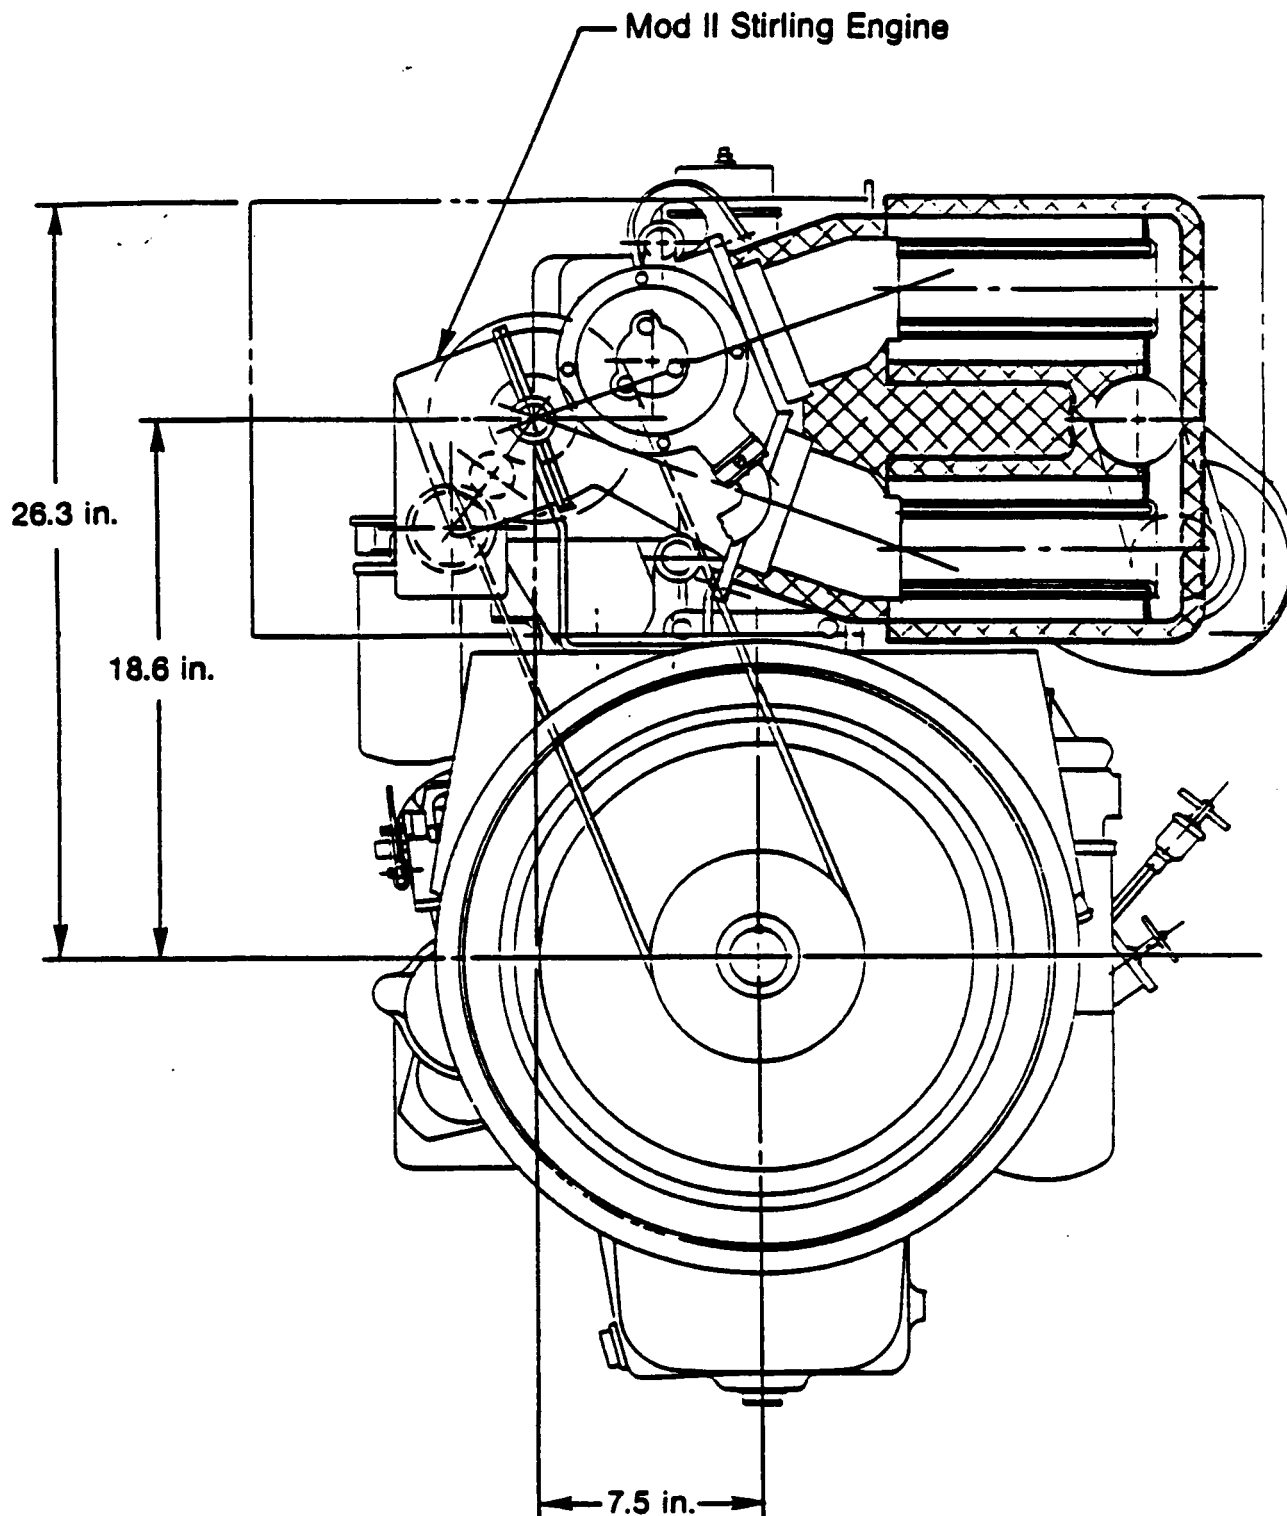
Diesel/Stirling Engine Integration (End View)
